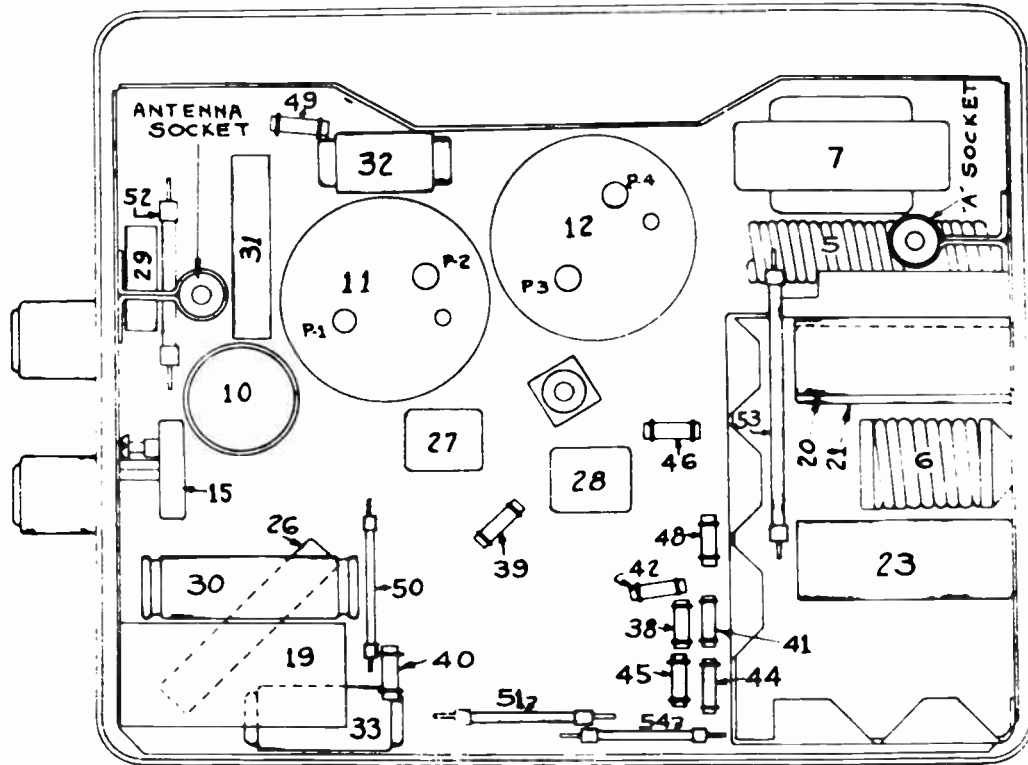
PARTS LAYOUT--BOTTOM VIEW
